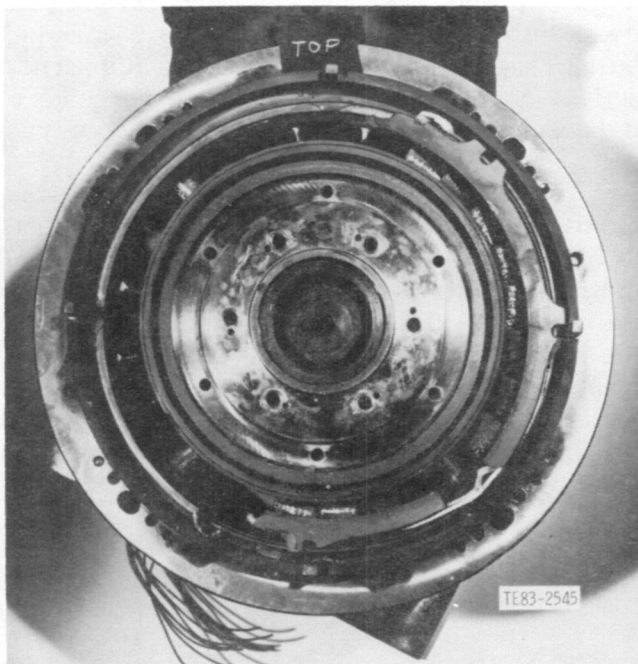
Gasifier nozzle assembly for engine C-4, TD14.
